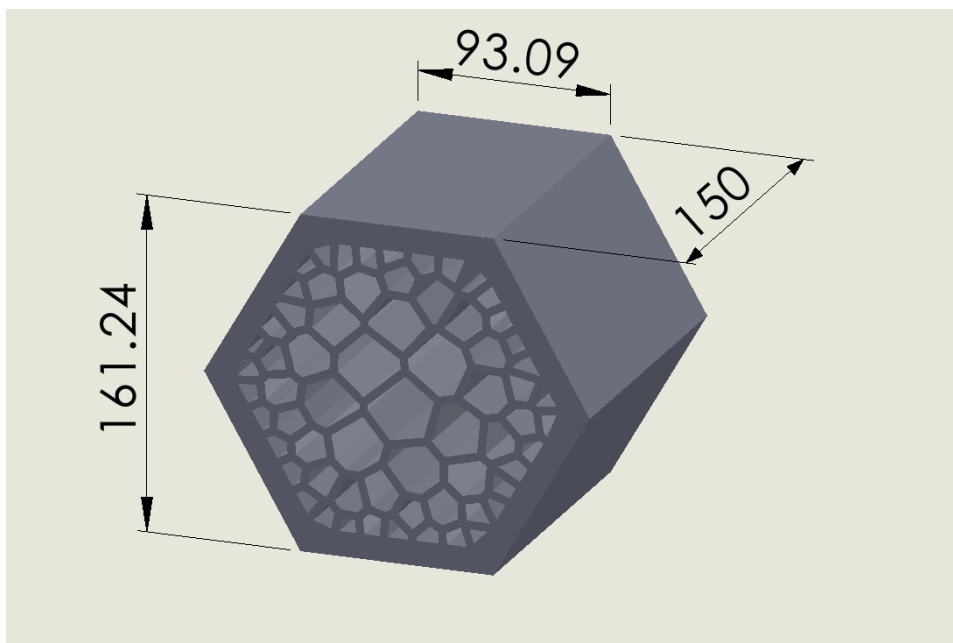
3D model of the presented hexagonal honeycomb with the dimensions [mm].
